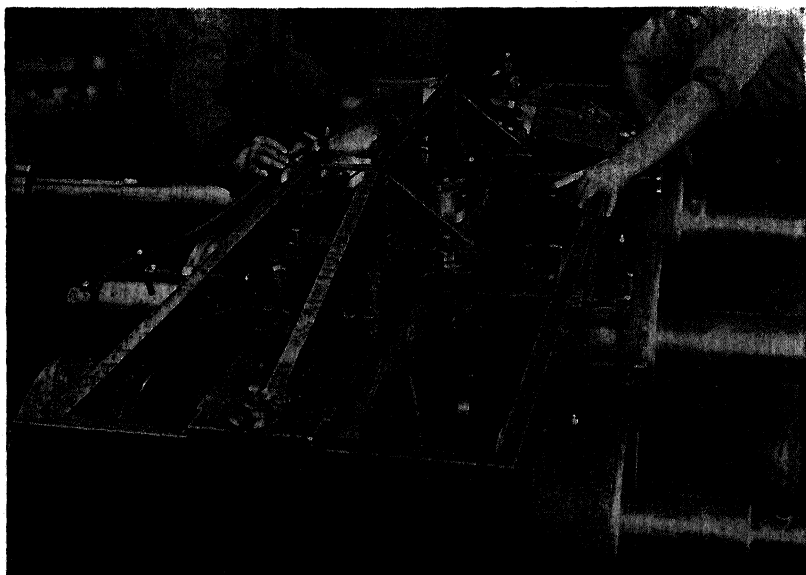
Welded steel fixtures used for milling a gear box for a road grader. Welded construction saved 80% in cost.
